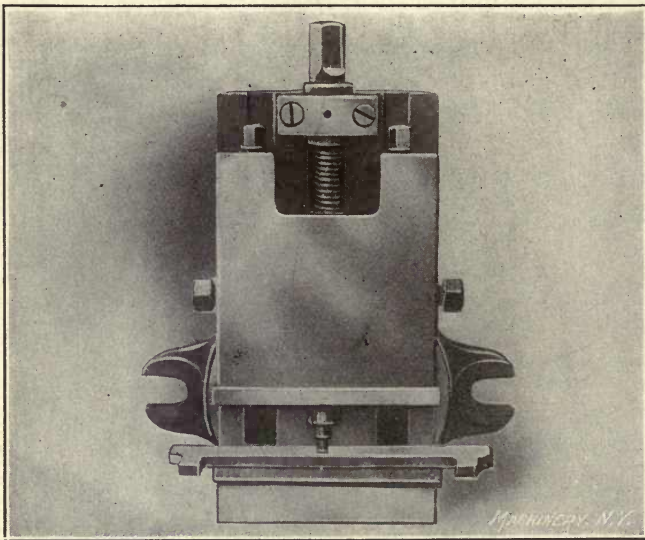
View of Machine Vise, showing a Gage Clamped without Springing it
